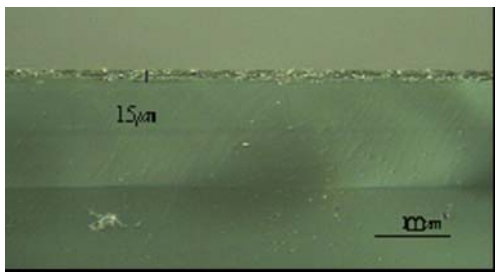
Section view of cut surface by wheel scribe with vibration input
